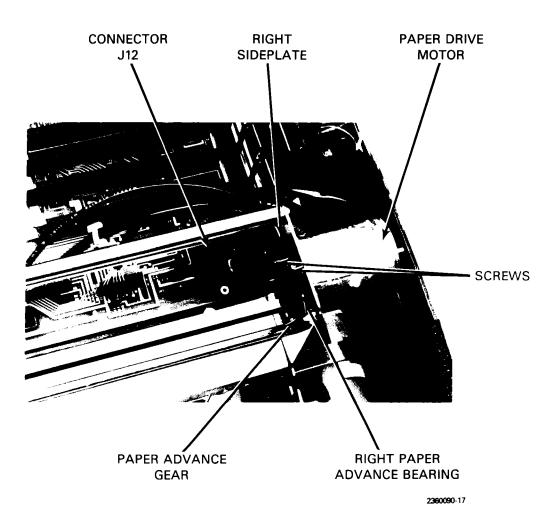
Paper Drive Motor with Gear, Connector, and Shaft
